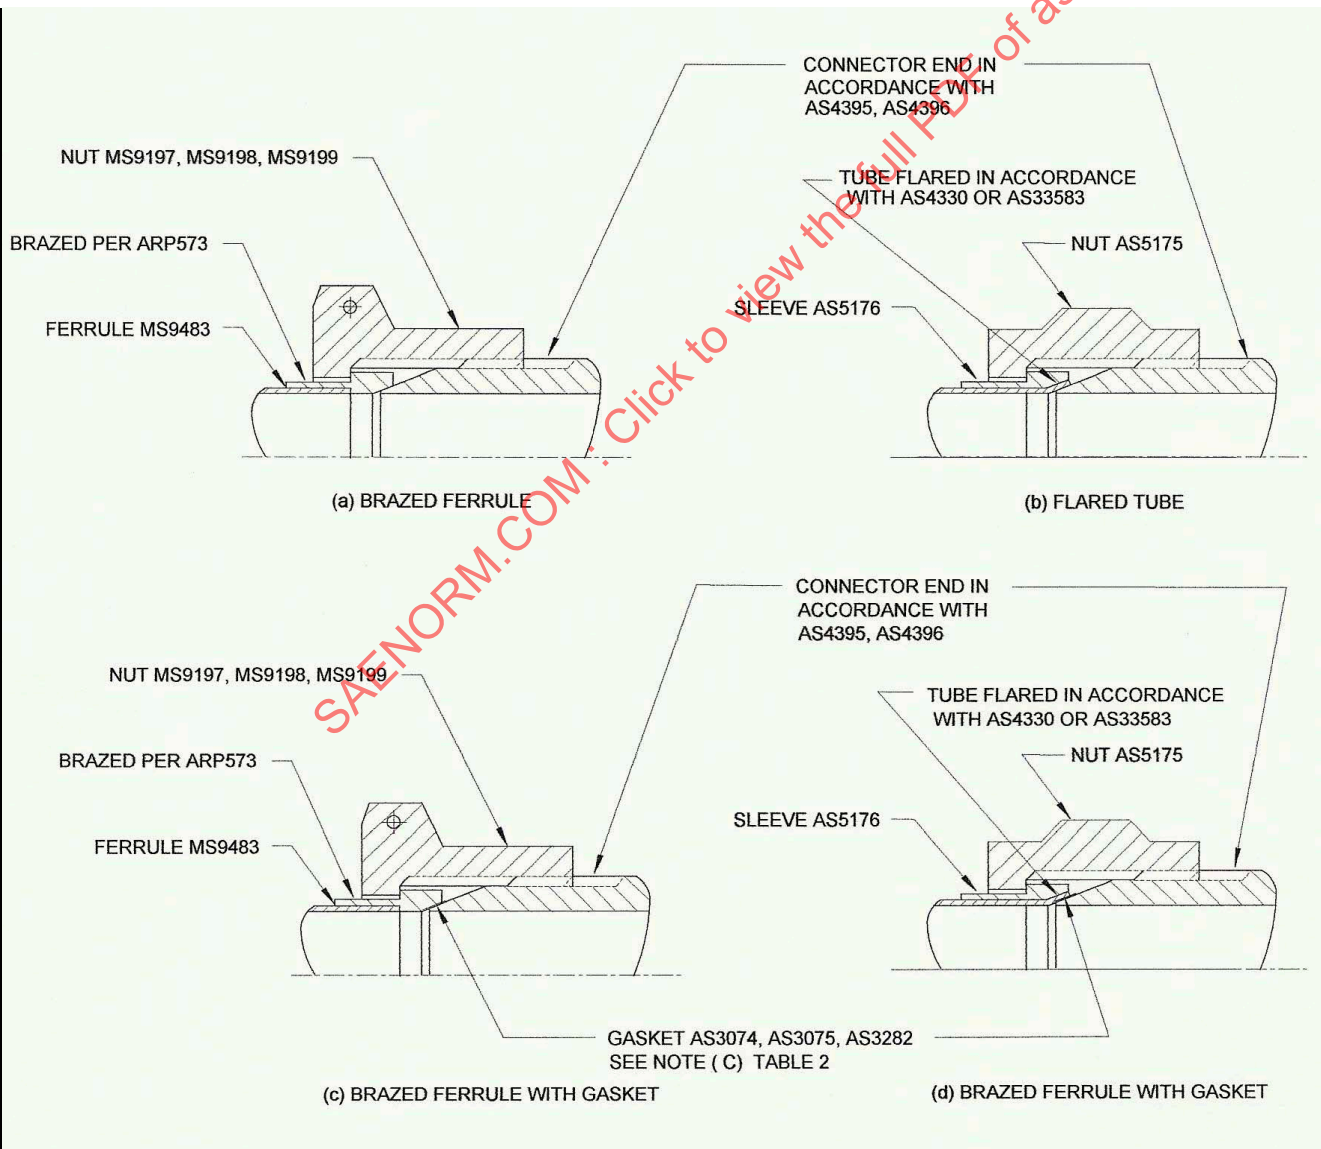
CONE END CONNECTORS FOR FLARED TUBE AND BRAZED FERRULE
